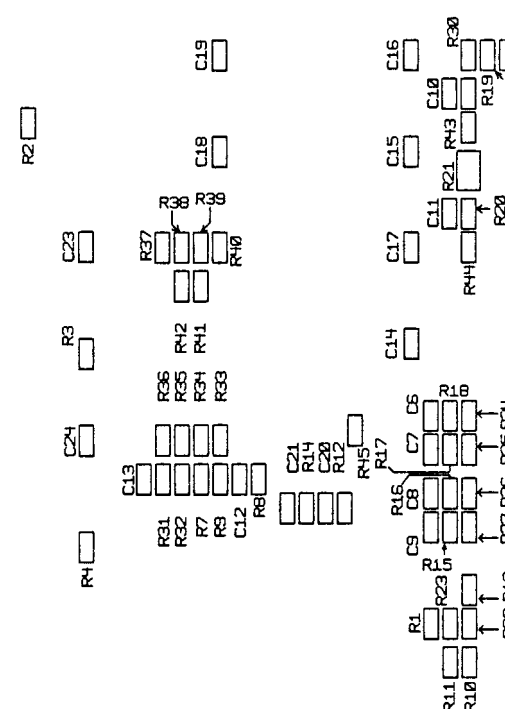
B81307* Main Board Component Layout (Soldered side)
